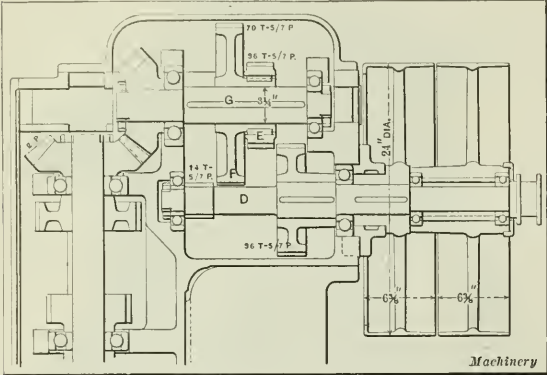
Arrangement of Drive from Pulley Shaft through Back-gears
